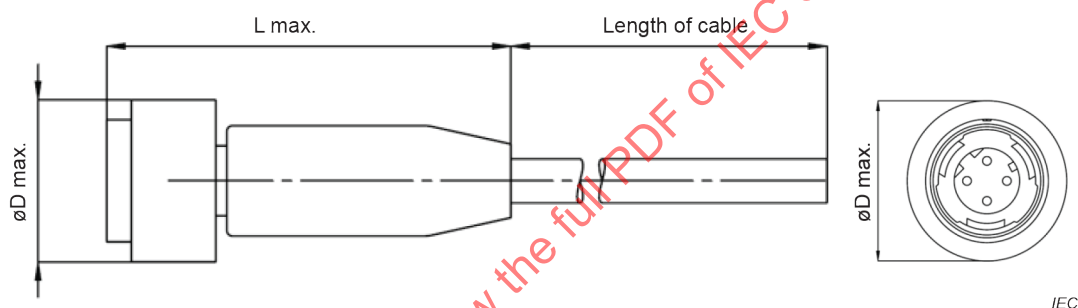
Style LF_PPI_PPO – Non-rewireable connector, with female contacts, straight version, with inner and outer push-pull locking
